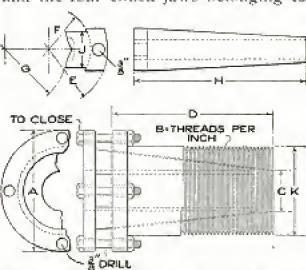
Four Jaws are Used to Clamp the Pipe in the Inner Bushing of the Machine
